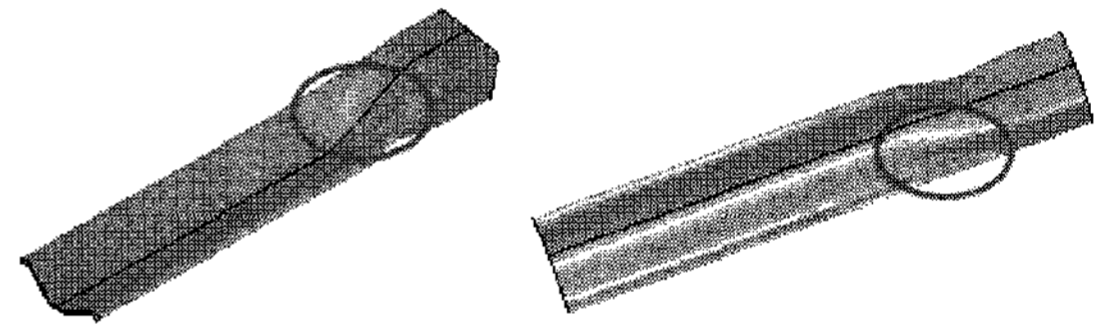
Deformed shape of the tube with the initial design at OP10 stage
